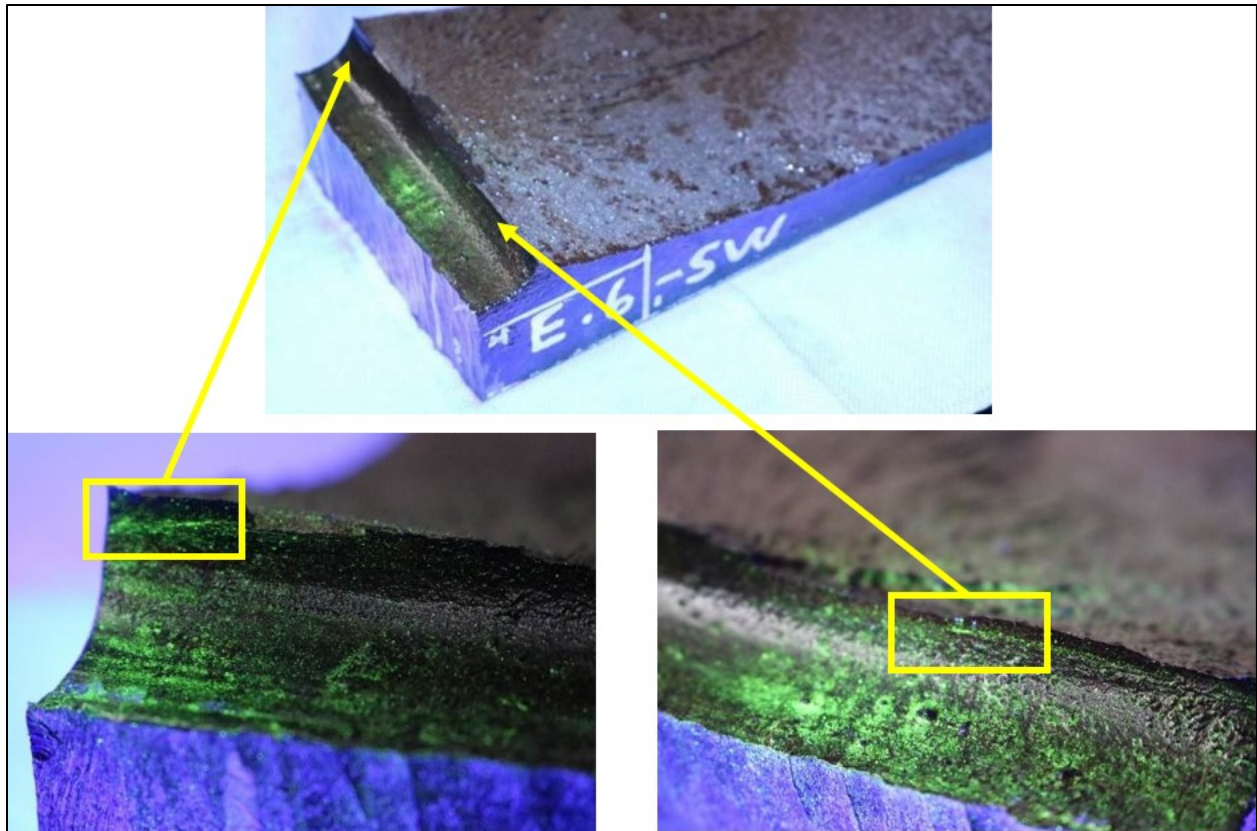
Secondary cracking in the radius of the weld access hole of sample E.6-SW as identified by fluorescent magnetic particle testing.
